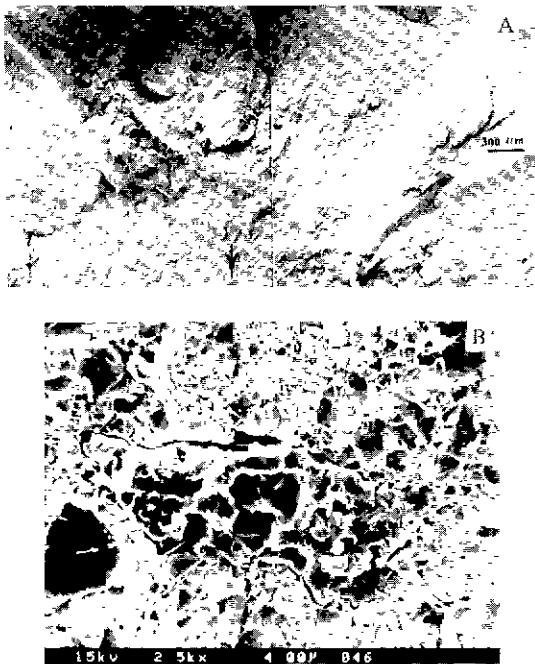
Fracture surface[A] and failure source[B] showing a non-uniformly dispersed cobalt phase[WC-16 Co].
